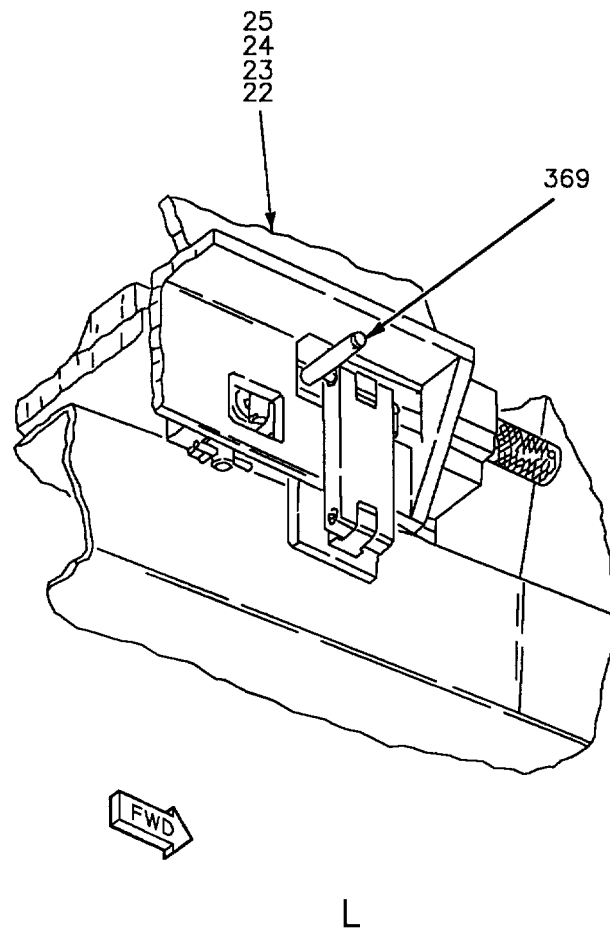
Drilling New Transparency and Structure (Sheet 6)
